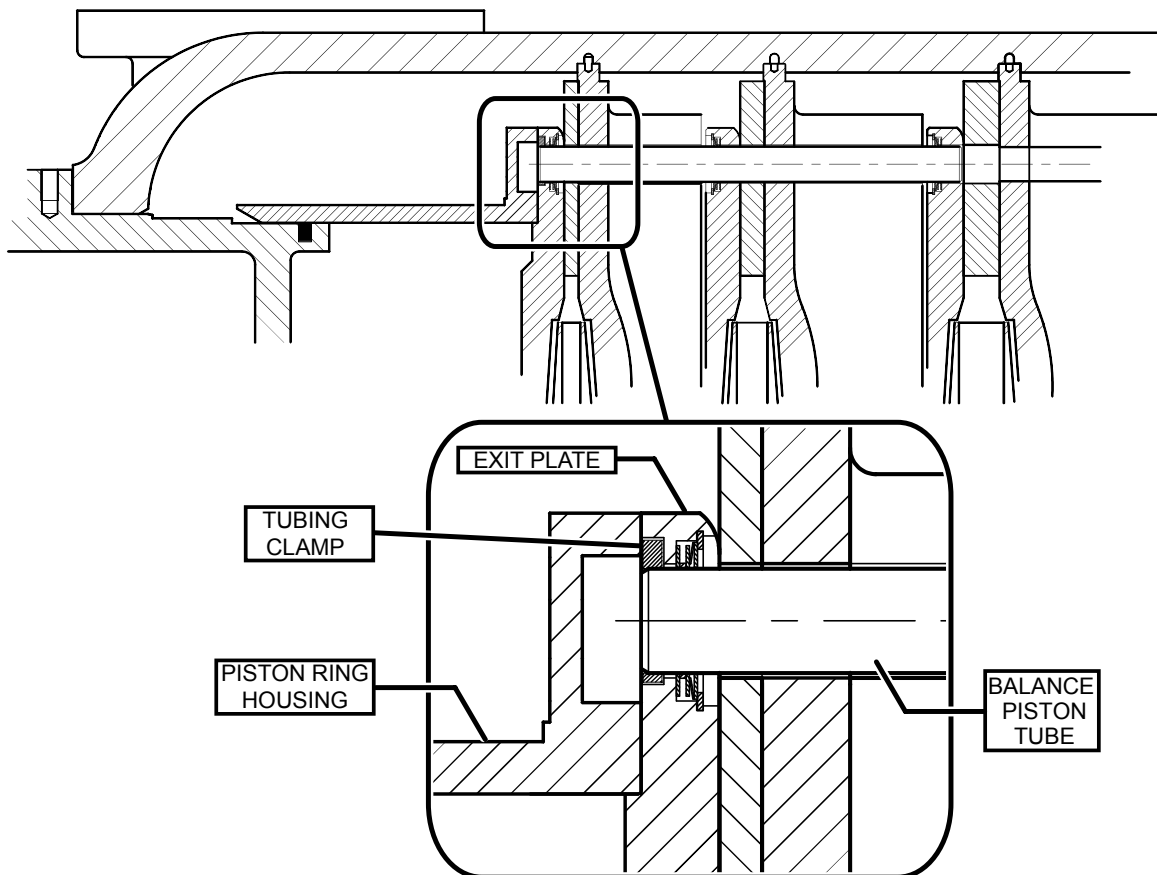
INSTALLED TUBING CLAMP DETAILS
